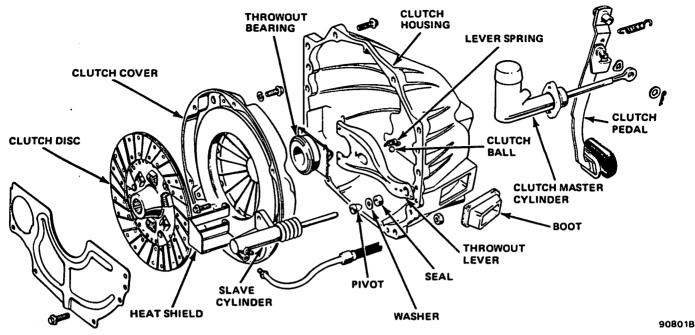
A-4 Clutch Assembly—Four-Cylinder CJ and Scrambler Models
